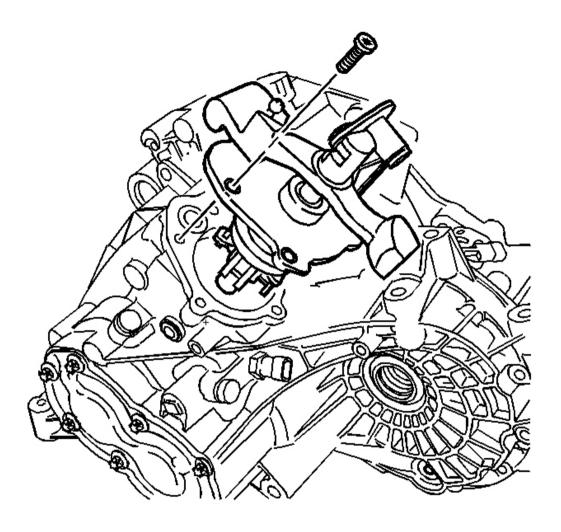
View Of Shifter Assembly Courtesy of GENERAL MOTORS CORP.
